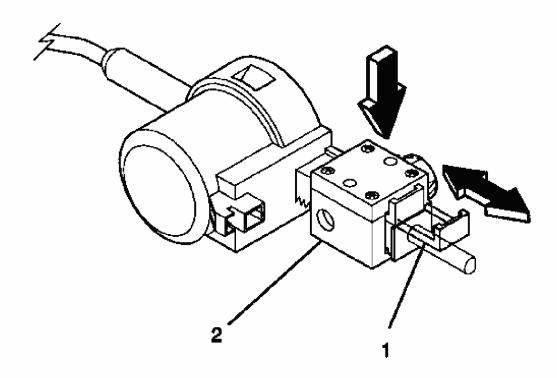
Adjusting Automatic Transmission Shift Lock Control Actuator Courtesy of GENERAL MOTORS CORP.
